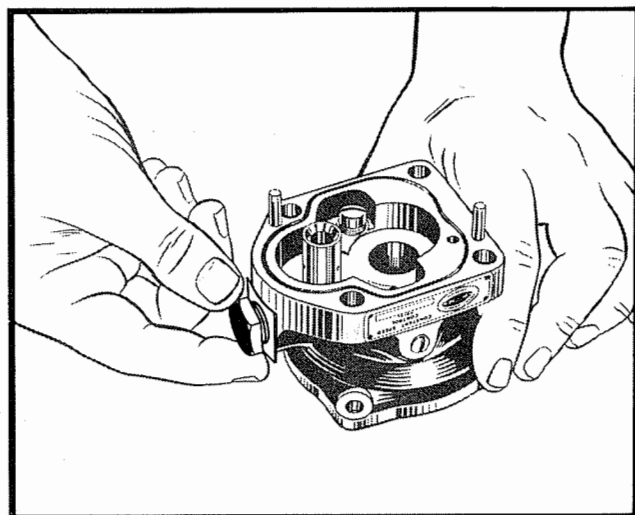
Inserting Relief Valve Plug and Tab Lock Gasket
